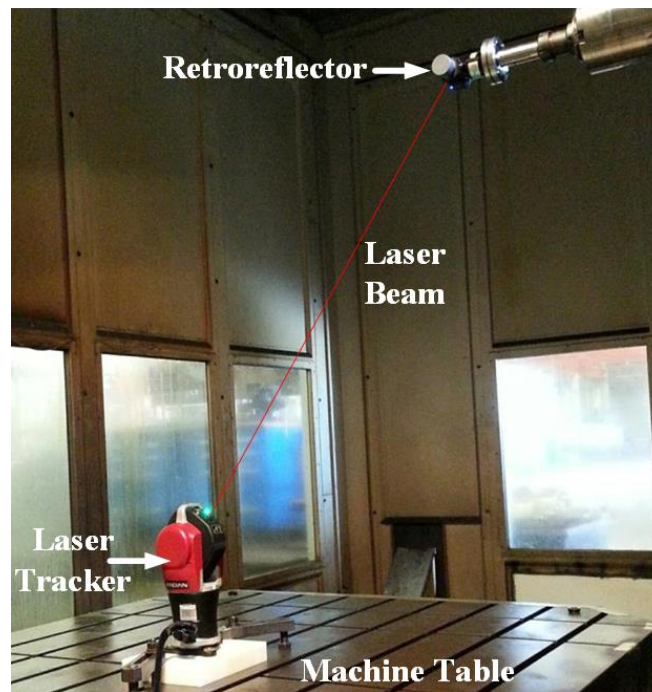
Setup of laser tracker and retroreflector in a machine tool work cell.
